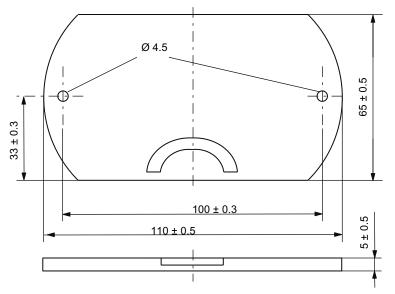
Fixing pocket 6GT2390-0AA00 for MDS D100
